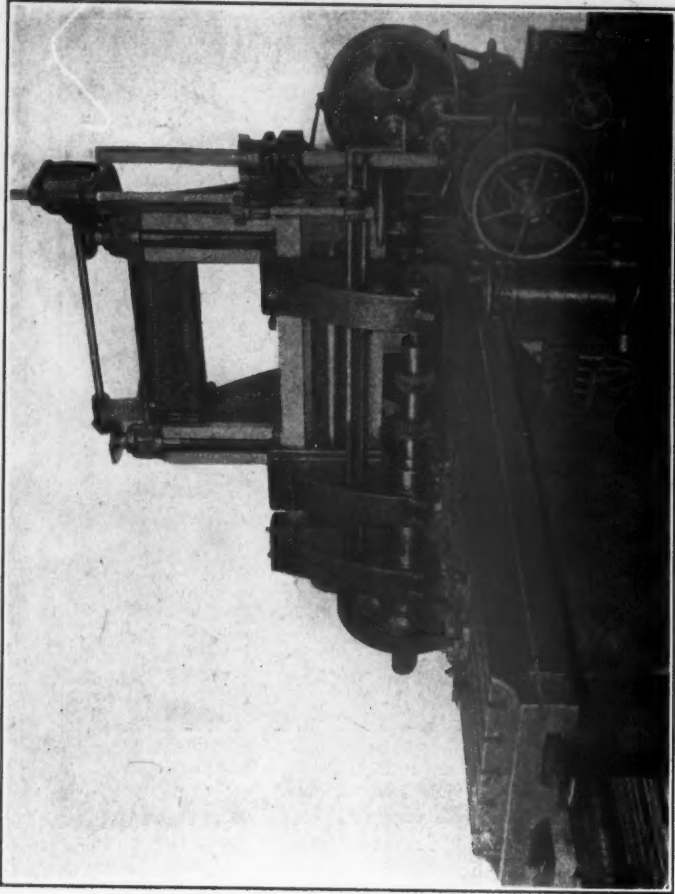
CROCKER-WHEELER MULTIPLE-VOLTAGE MOTOR DRIVE UPON A LARGE HORIZONTAL MILLING MACHINE.—HEMENT, MILES & CO.
